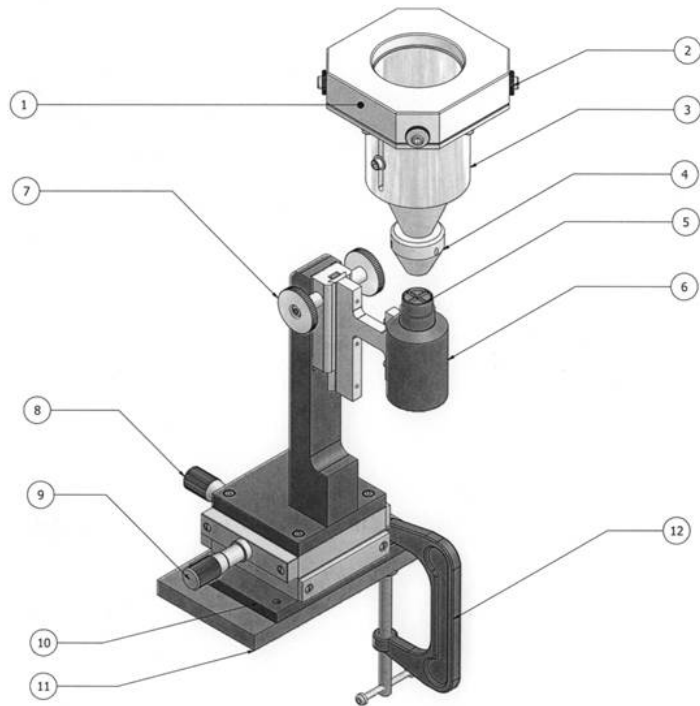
Illustrates the three-axis alignment test jig clamped to the work surface with the coaxial nozzle and nozzle height and alignment adaptor positioned over the test target.
